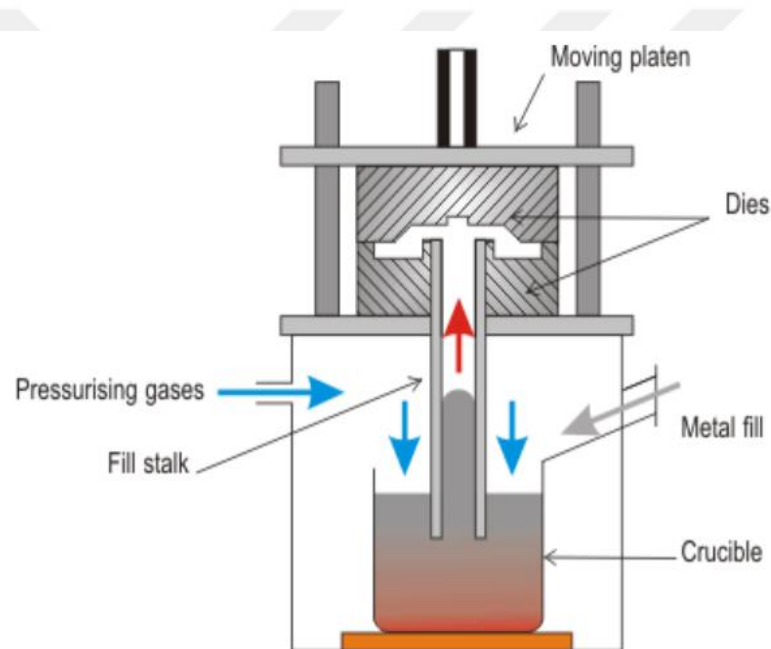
Low pressure casting machine (L&ES, 2014)
